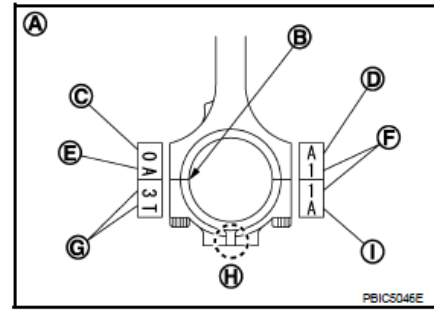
Identifying Front Mark On Connecting Rod Bearing Cap Position
